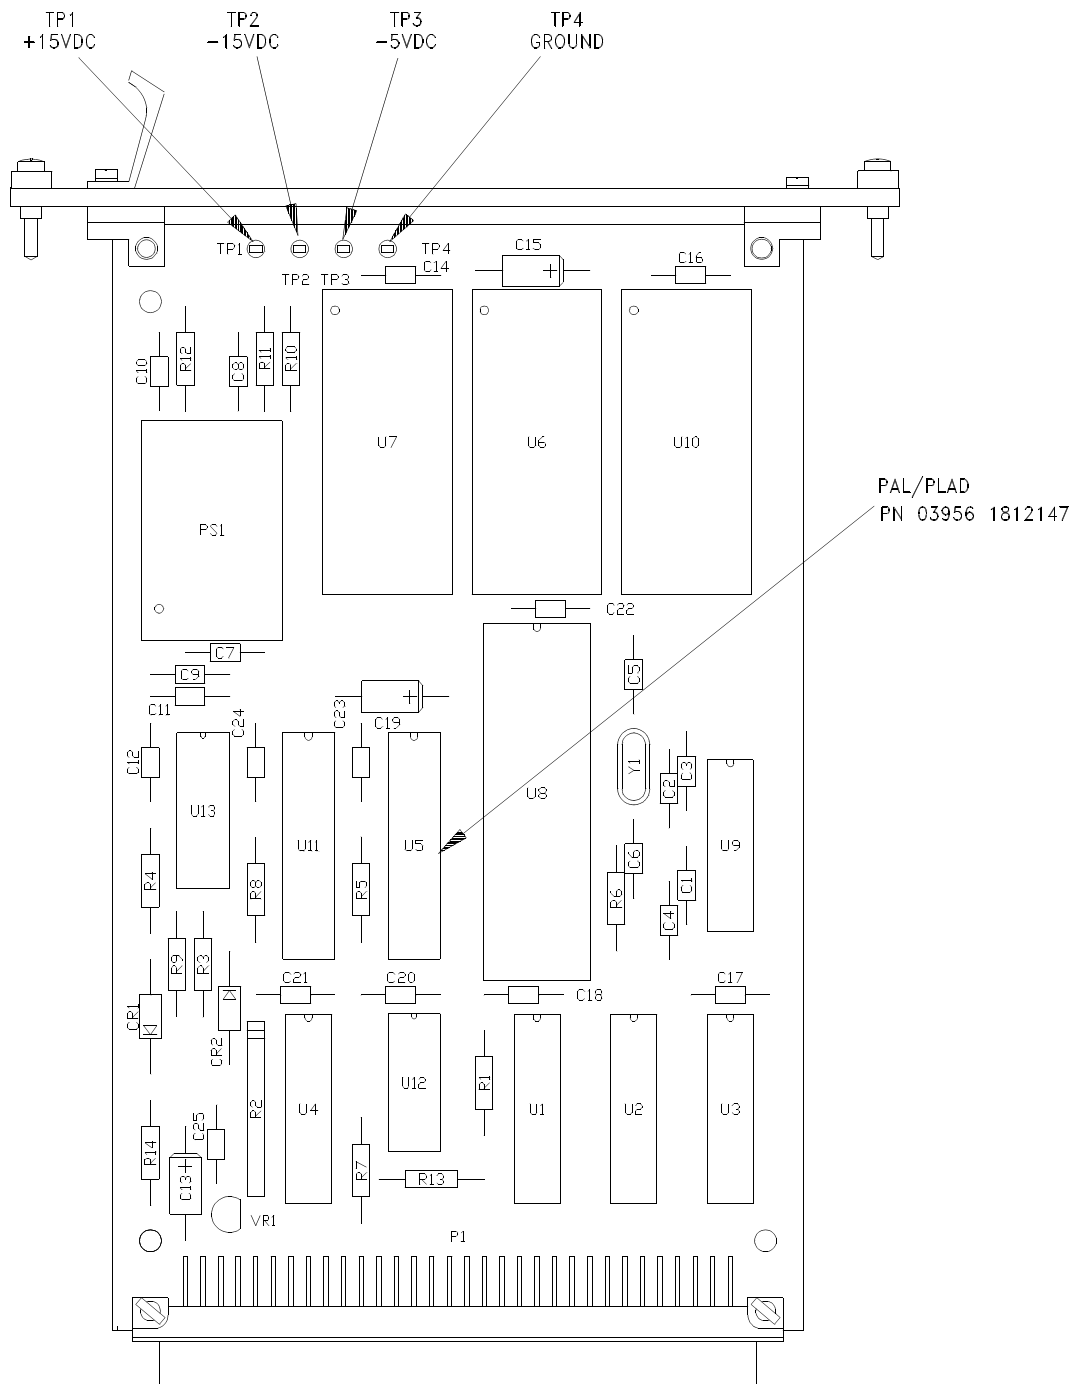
Step Driver Assembly (A6, A7) Configuration Identification
